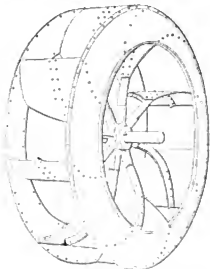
TYPICAL FAN WHEEL WITH CURVED BLADES.
